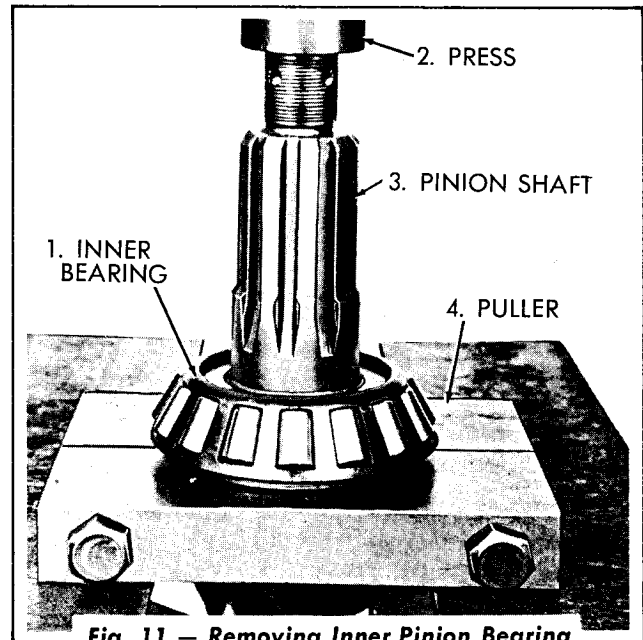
Removing Inner Pinion Bearing from Pinion Shaft
